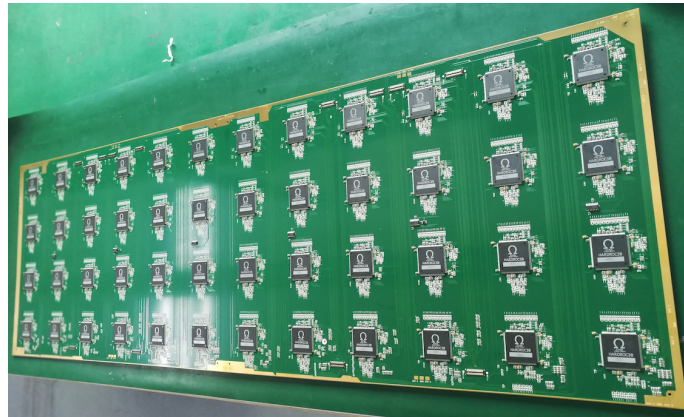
A new PCB equipped with the HR3 ASICs. The PCB is 100 cm × 33.3 cm. Several PCBs could be connected thanks to tiny flexible connectors to read out very large GRPC detectors.
